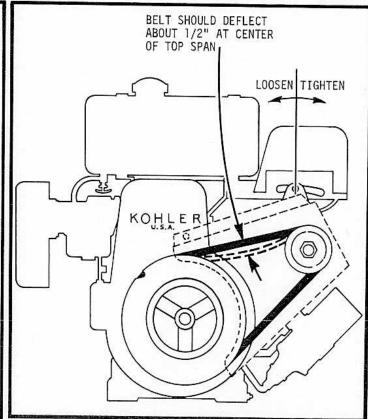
BELT TENSION CHECK AND ADJUSTMENT
